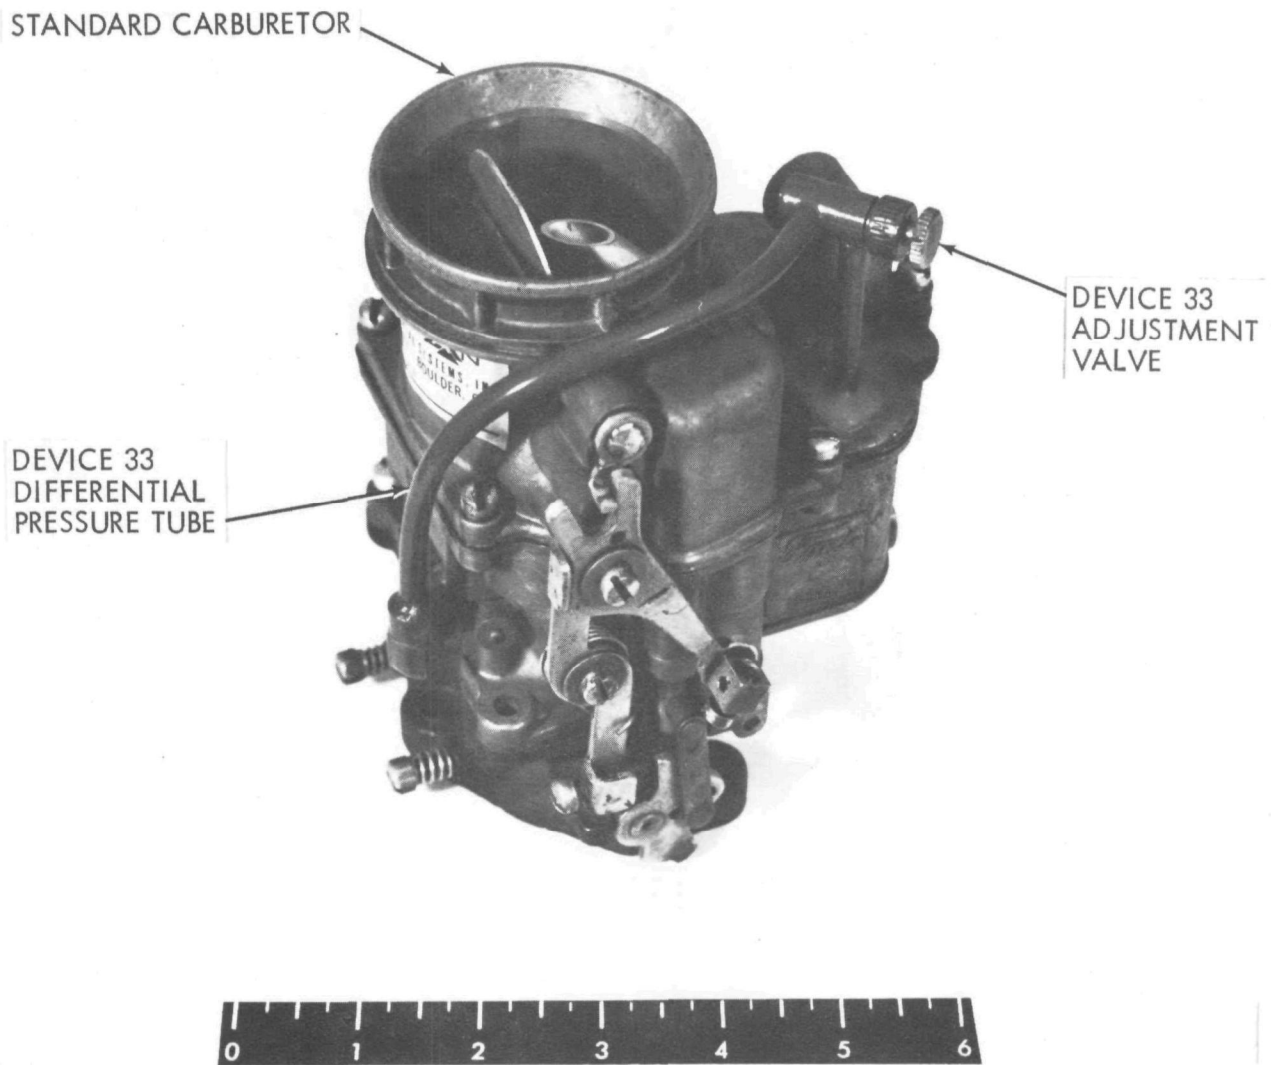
DEVICE 33 CARBURETOR MODIFICATION (MAIN JET DIFFERENTIAL PRESSURE) CONFIGURATION
